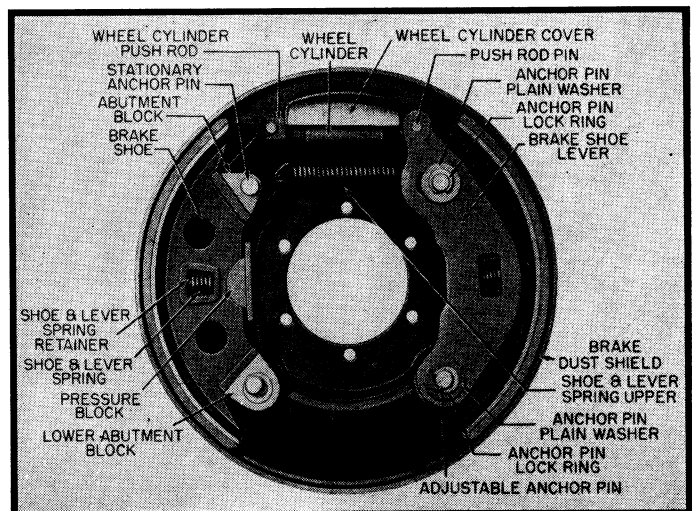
Timken DPH anchor pin brake. Top half of left lever is removed
